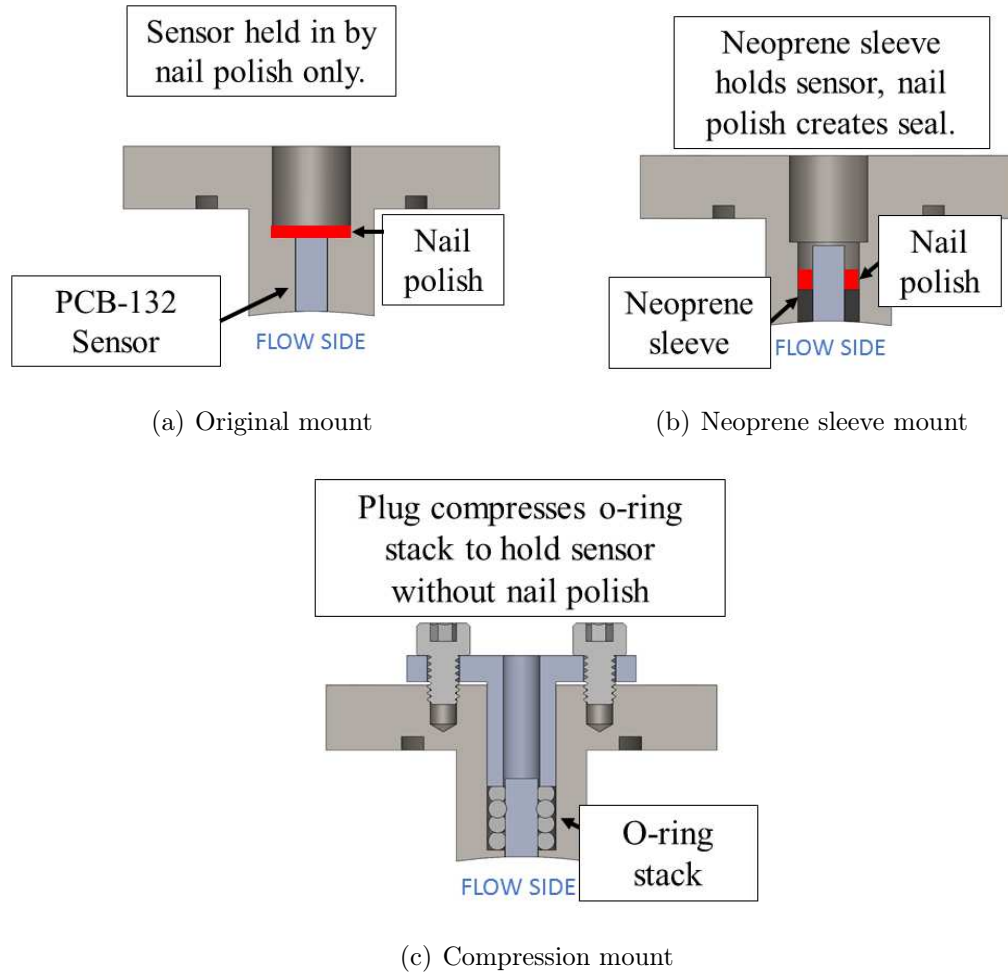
Cross-sectional views of different static-mounting designs for PCB132 in P3IST.
